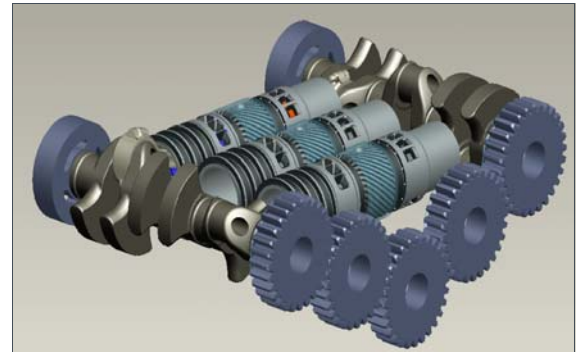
Cutaway of Power Module Concept, Showing Internal Gear Train
